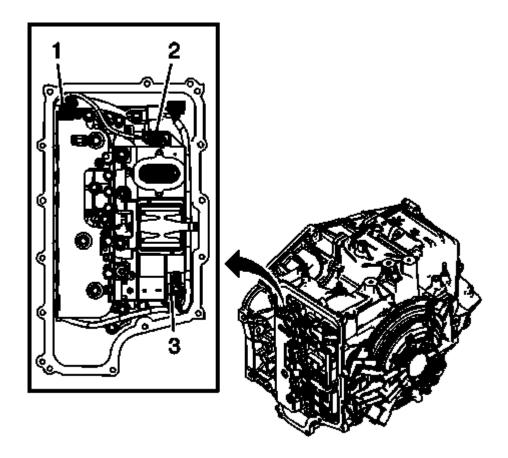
Identifying Control Valve Body Bolts Torque Sequence Courtesy of GENERAL MOTORS COMPANY
